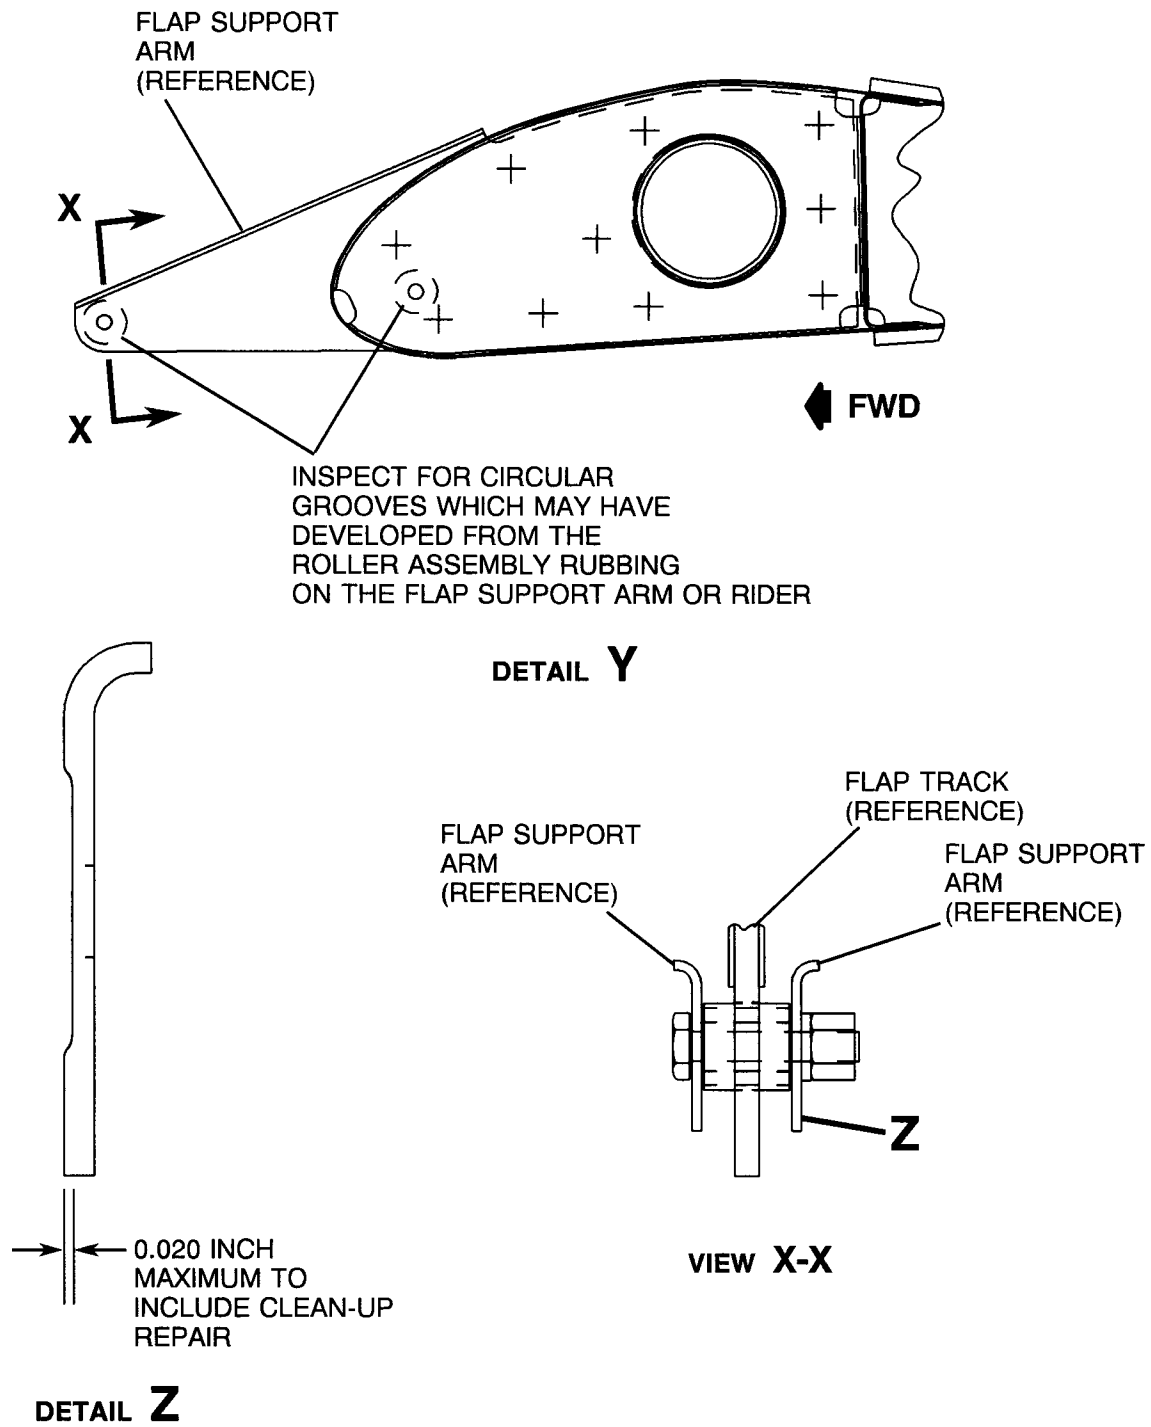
Flap Support Rib Assembly and Roller Bearing Inspection (Sheet 6)
